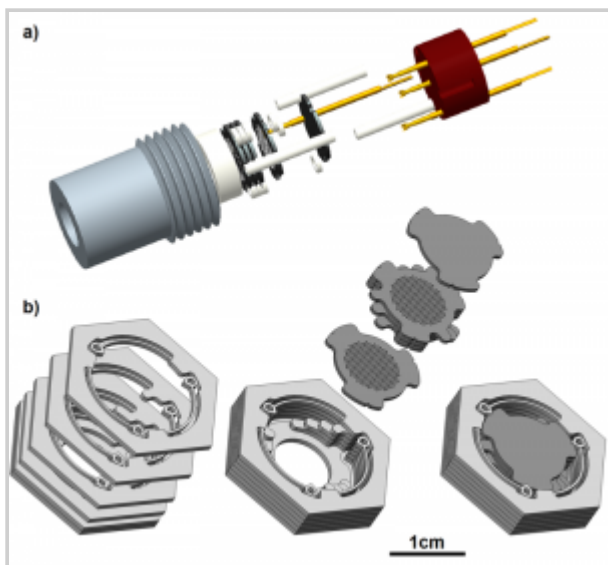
Exploded views of a) hybrid RPA with stainless steel housing and b) fully micromachined RPA [2].
